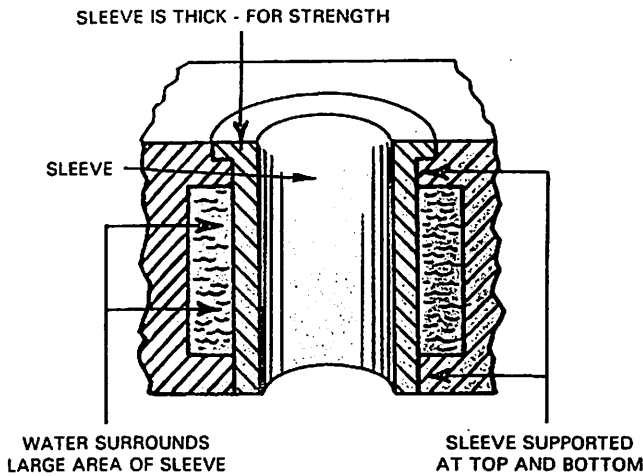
"Wet" sleeve in place in cylinder hole.
